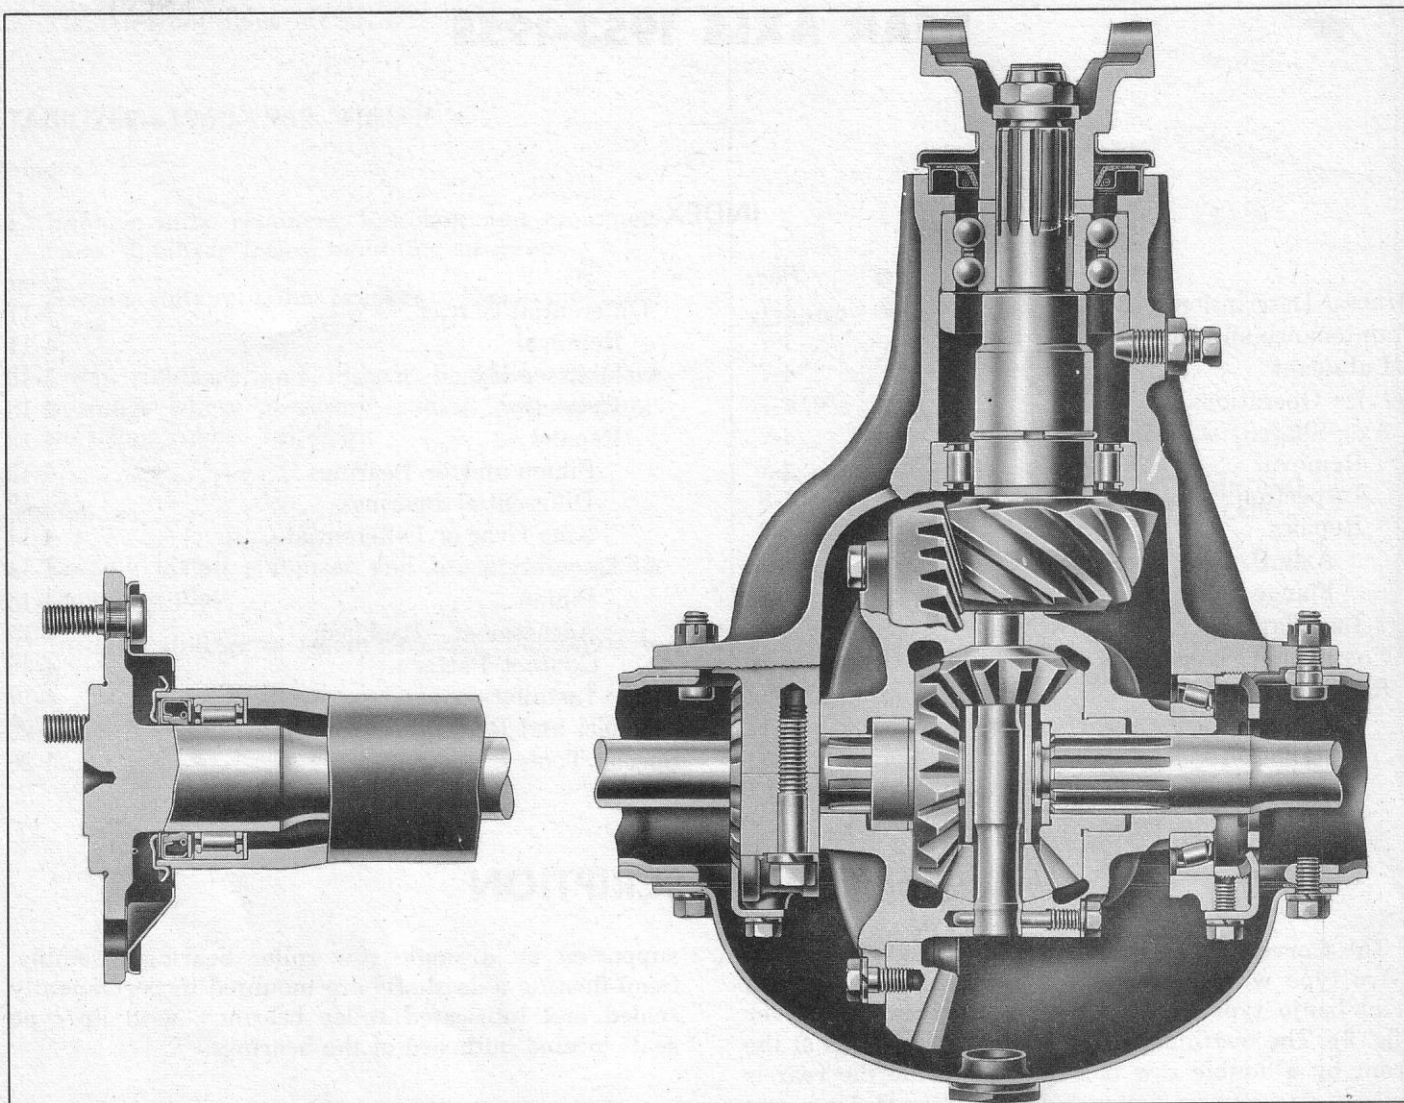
1953-1955 Axle Assembly—Cross-Section
